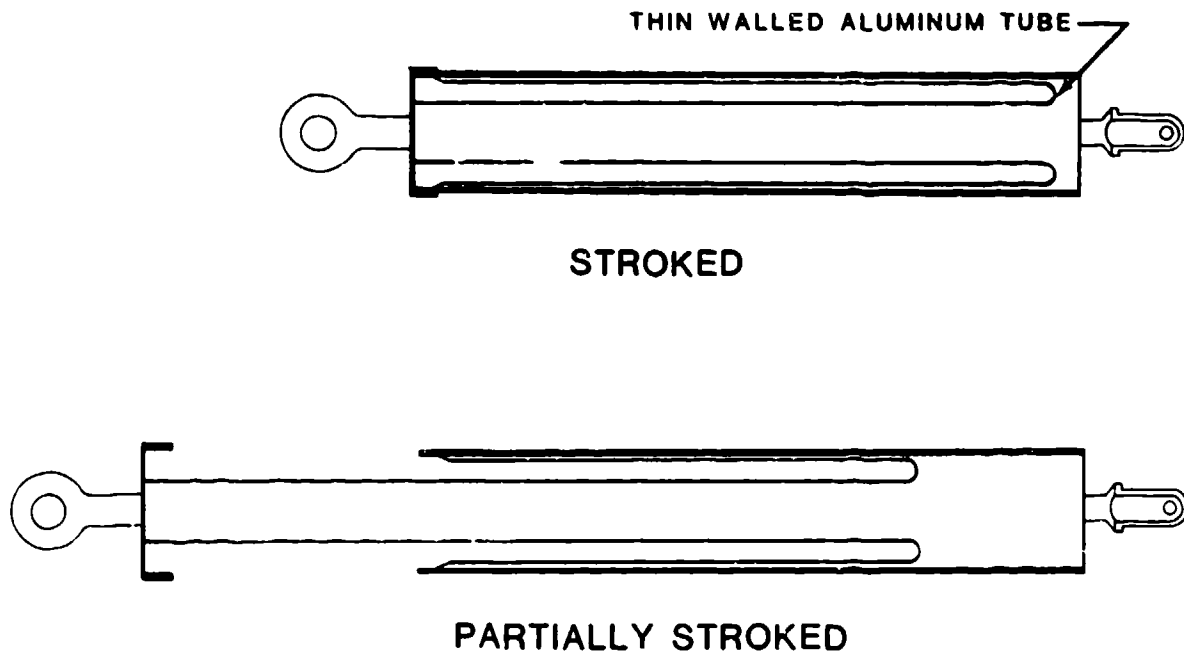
Cross-sectional view of an inverted-tube energy absorber.
